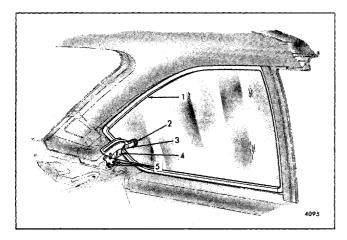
Optional Swing-Out Quarter Window - H-77 Style Shown (X-17,27 Styles Similar)
